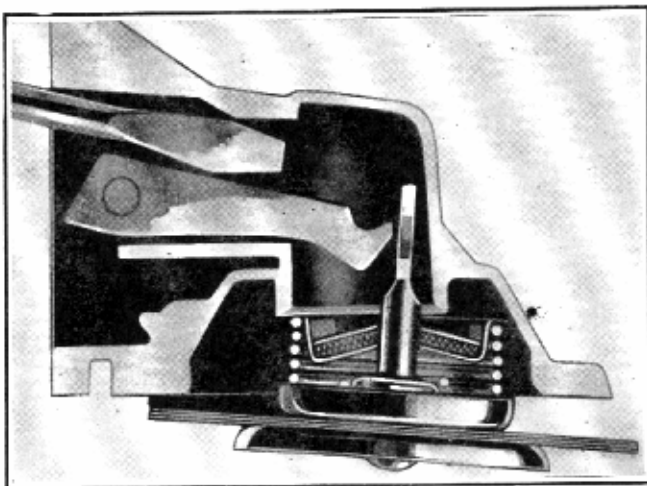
Method of Assembling Diaphragm Assembly to Link
